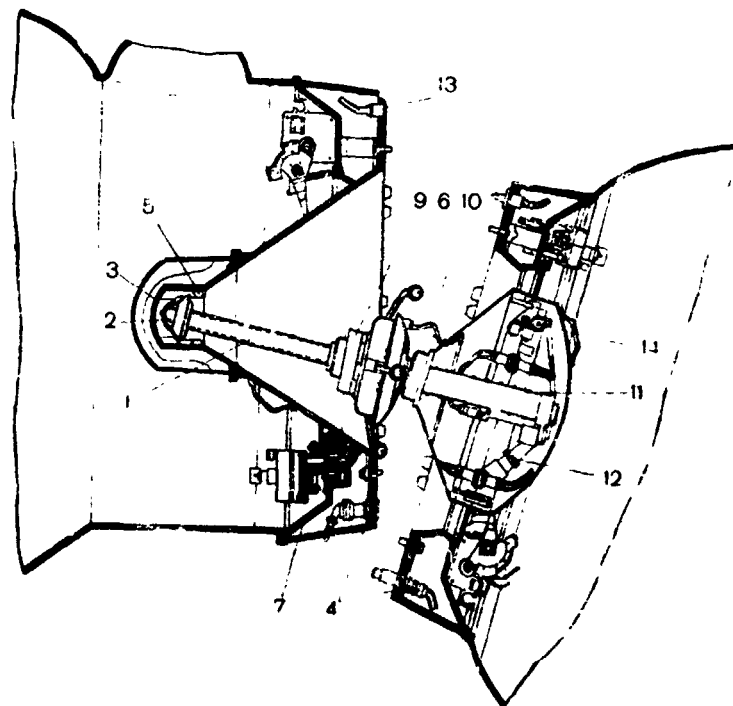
Simplified drawing of docking device used during docking of Soyuz-11 and Salyut. The device is shown at the moment of coupling the craft: 1--rod; 2--rod head with catches; 3--receiving socket; 4--water connection; 5--stop; 6--alignment levers; 7--docking frame; 8--receiving cone; 9--electric drive; 10--ball joint; 11--guide rods; 12--lateral shock absorber; 13--electric connection; 14--electro-mechanical damper.
